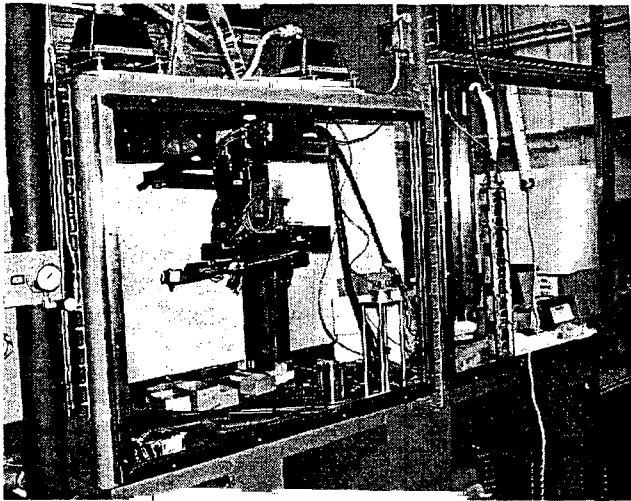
Puck Handling System Being Installed in Furnace Glovebox
